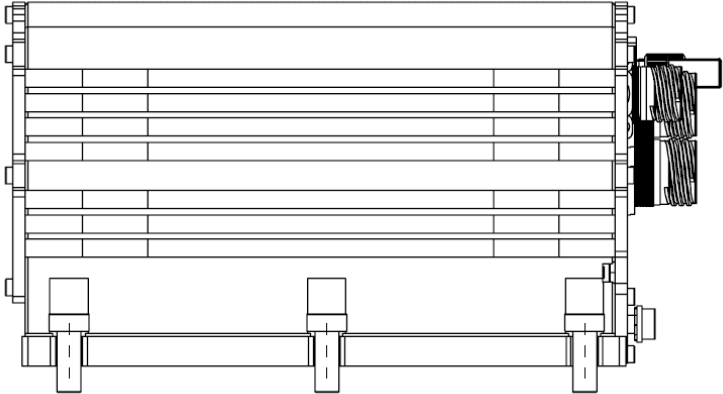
DARC-VX208 - Dimensions – Side view (in mm)
